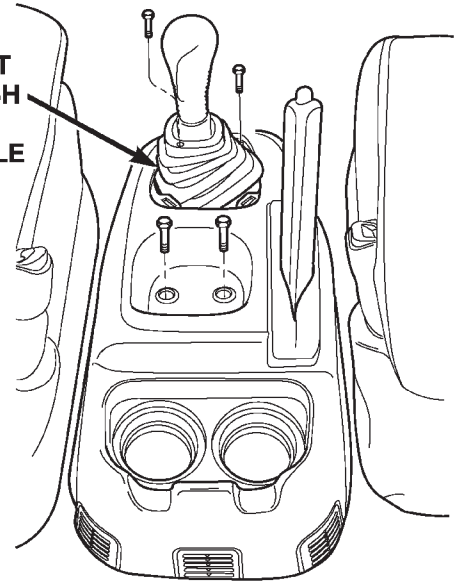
Console, Parking Brake Lever, and Gearshift Boot
